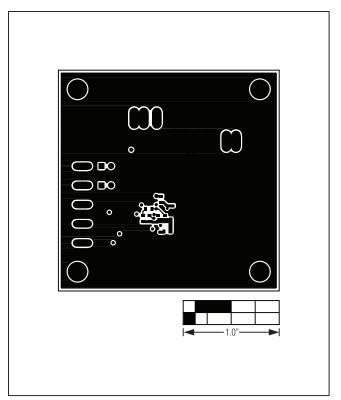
MAX15108 EV Kit PCB Layout—Solder Side
